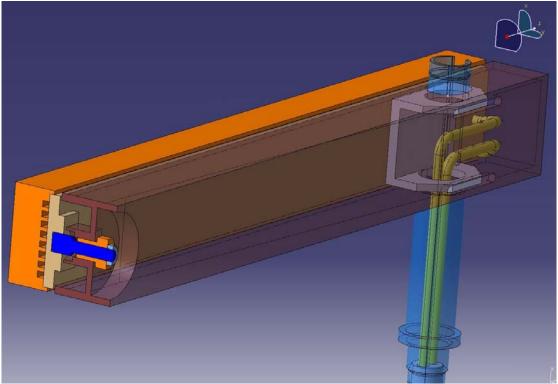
Cutaway of the jaw assembly. Cooling circuit has been machined on the jaw with a brazed back-plate ensuring that the system is watertight.
